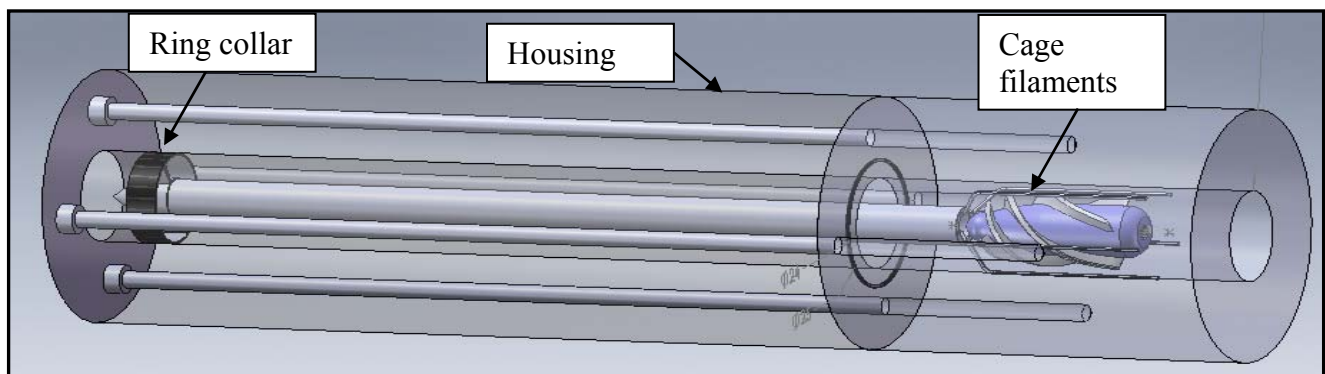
SolidWorks drawing of cage design for the adult blood pump prototype
